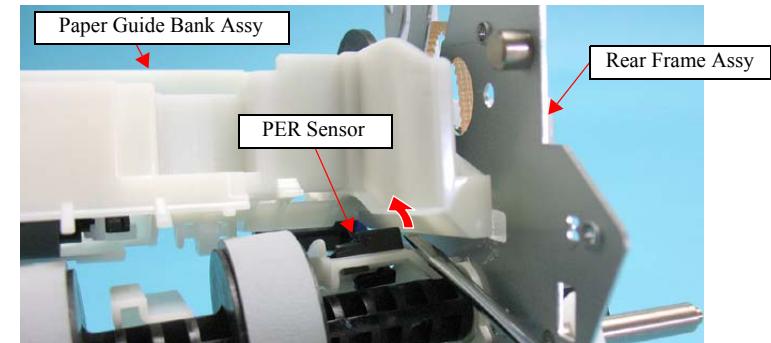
Removing the Paper Guide Bank Assy (3)
